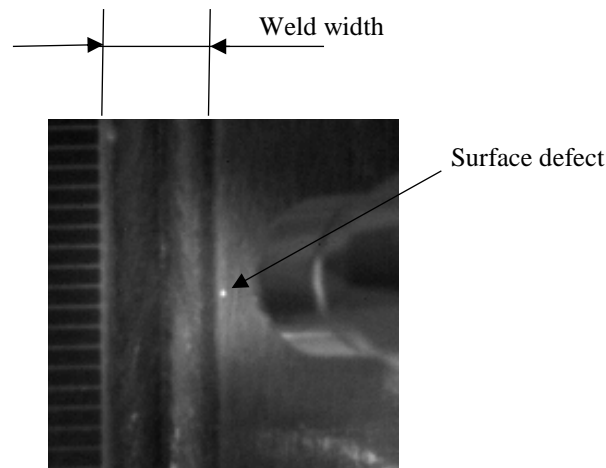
Example of image from thermography system. The bright spot is the detected defect, a surface notch with the width 140 μm and 260 μm . To the left of the weld joint, a ruler is visible.
